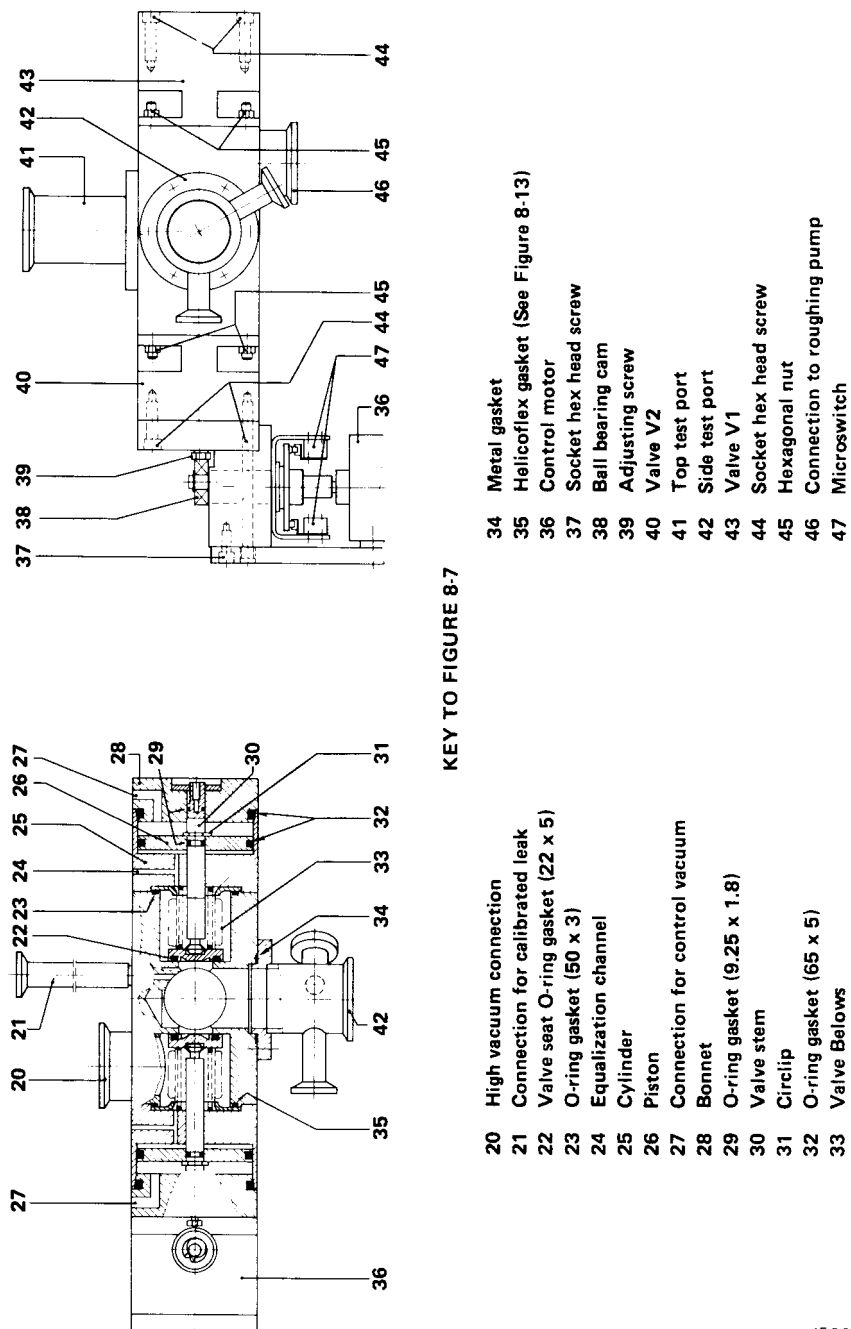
Cross Sectional and Side View of the Valve Block
